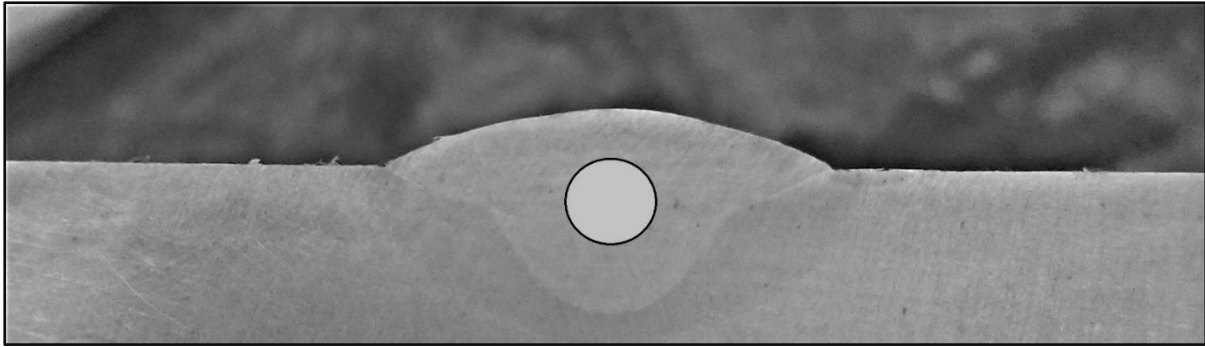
Photograph of weld cross-section with an overlay showing where the dilatometer samples were extracted. Weld bead was about 20 mm wide.
